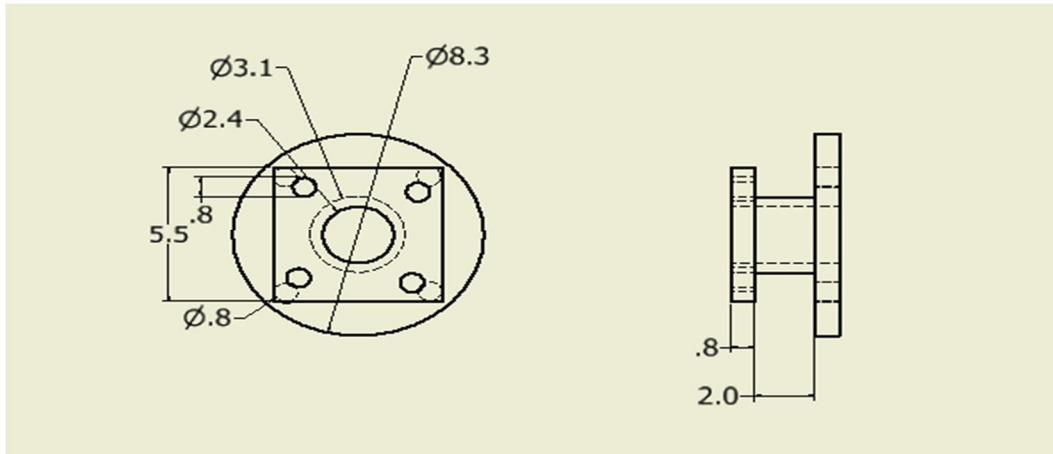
Dimensions of rotor and stator in UAFM
